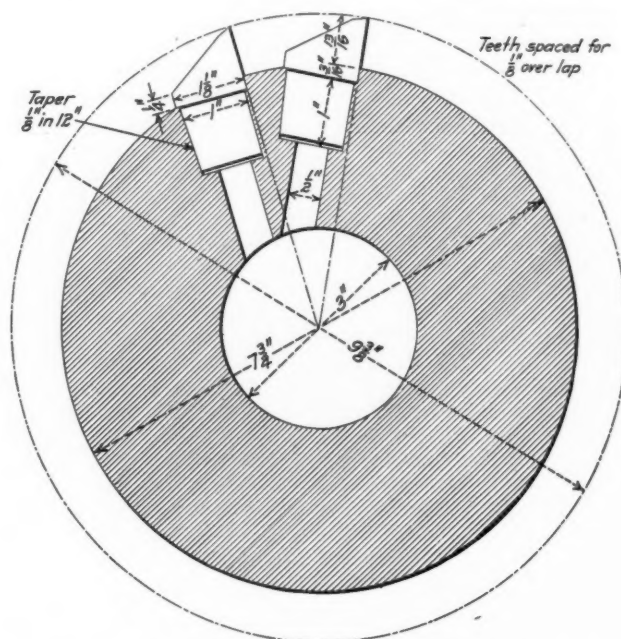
Detail of Tooth Arrangement in Slabbing Mill
